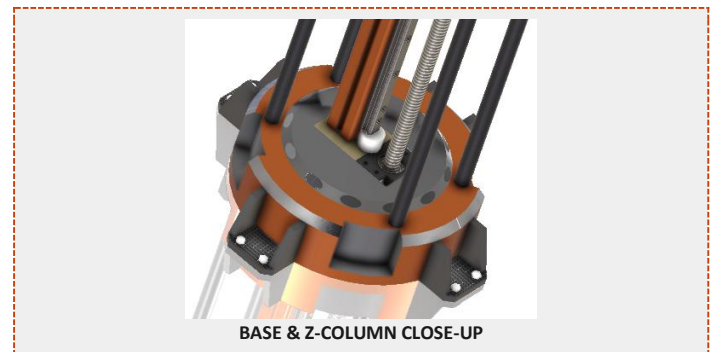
Base enclosure and Z-axis lead-screw column detail.
